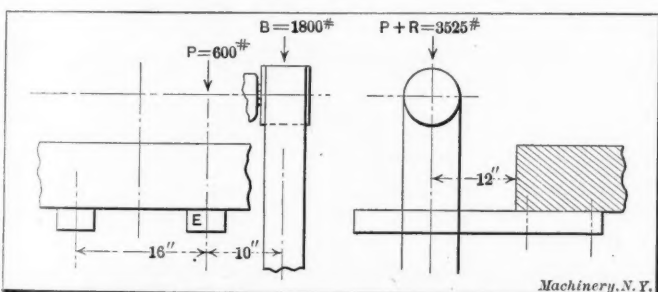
Motor Support of Machine-steel Bars, with Right-angle Drive
